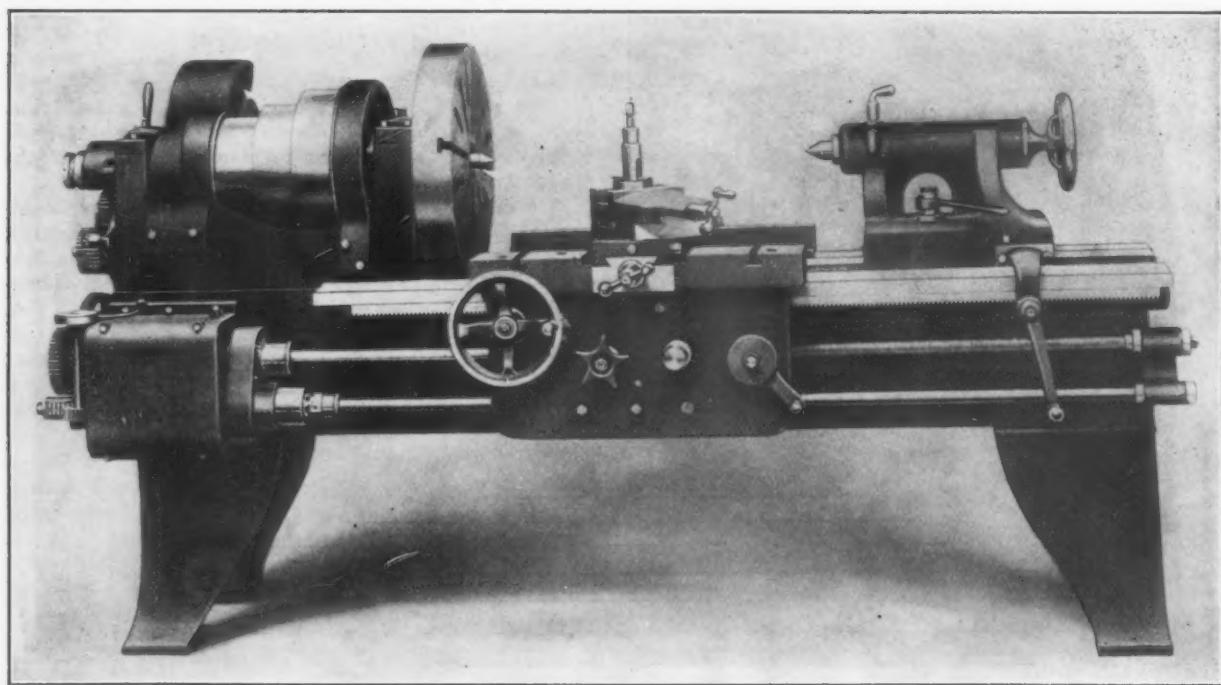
The new 20-In. Engine Lathe Built by the Whitcomb-Blaisdell Machine Tool Company, Worcester, Mass.
